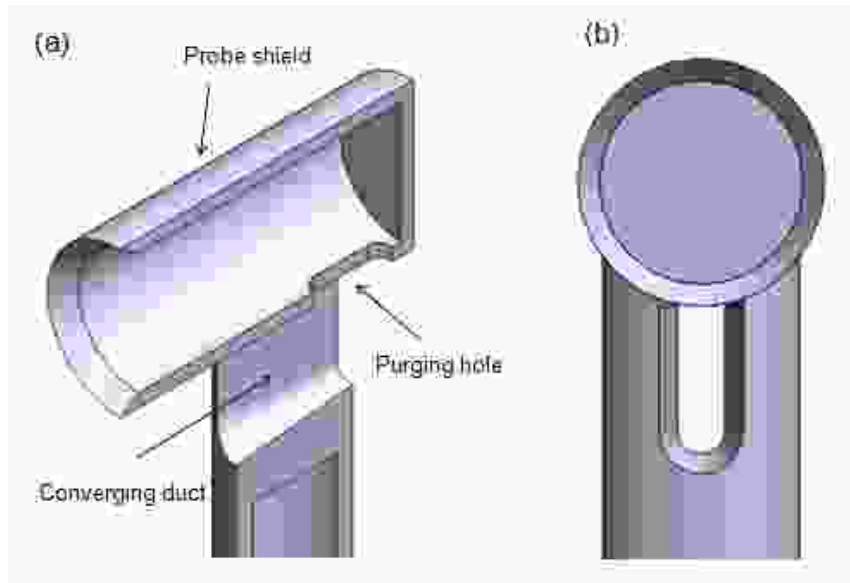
Conceptual design of a probe with a converging duct manufactured inside the shield (3D CAD drawing): (a) axonometric view, section; (b) front view.
